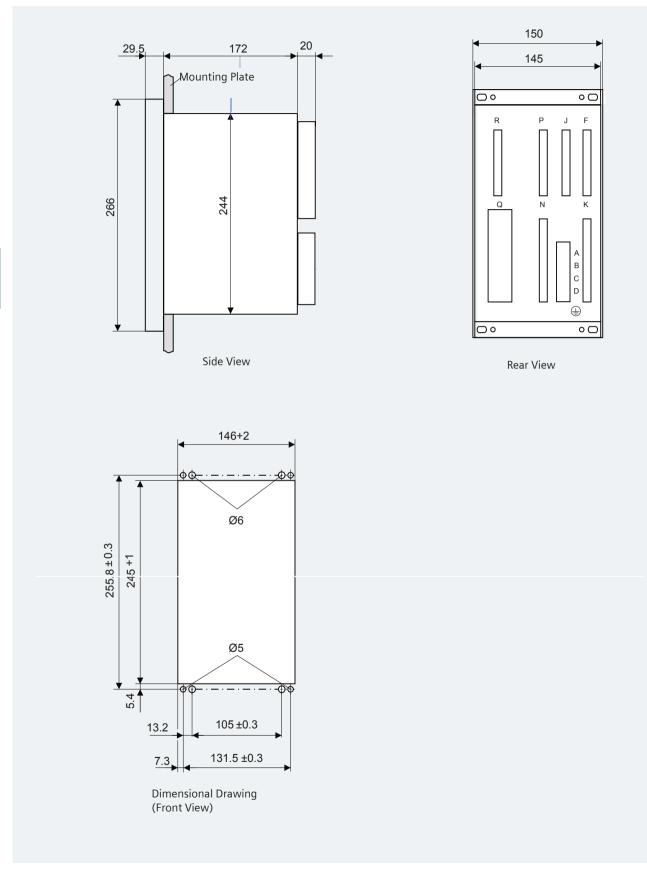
/155 Dimensional drawing for SIPROTEC 7SJ66 (housing size 1/3)
